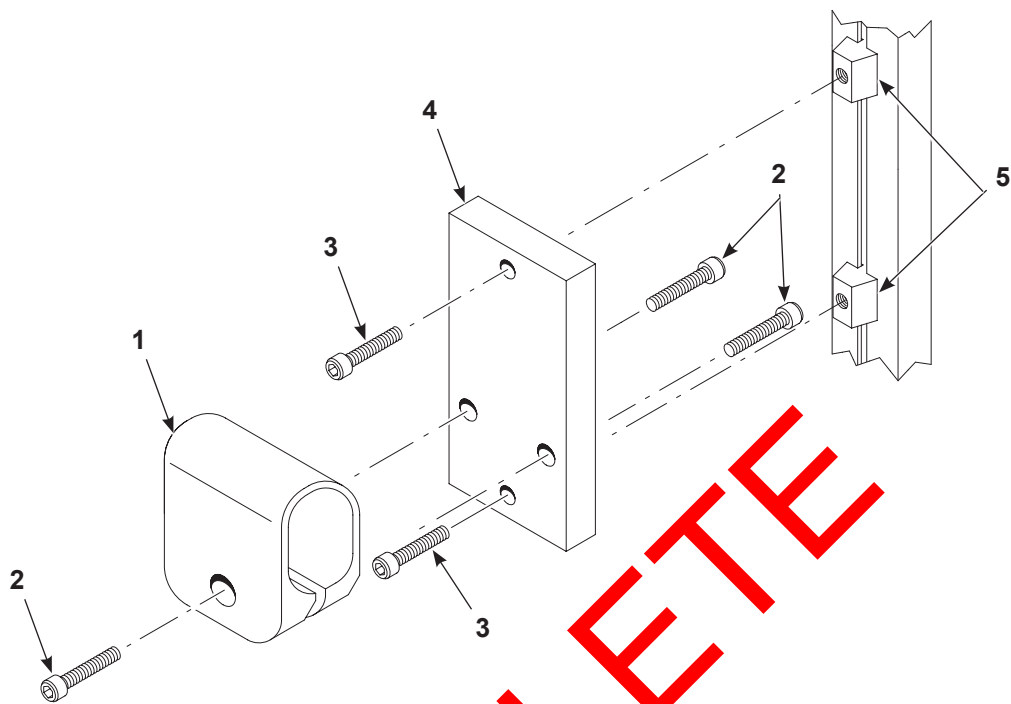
Extrusion Gun Mount Assembly for Tube-Mount Guns
